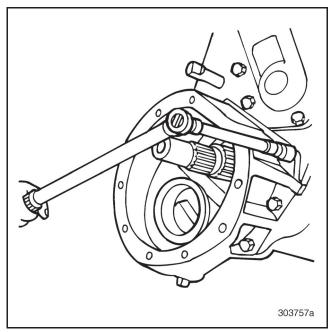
Installing Front-Drive Housing Capscrews and Dowel Bolts
